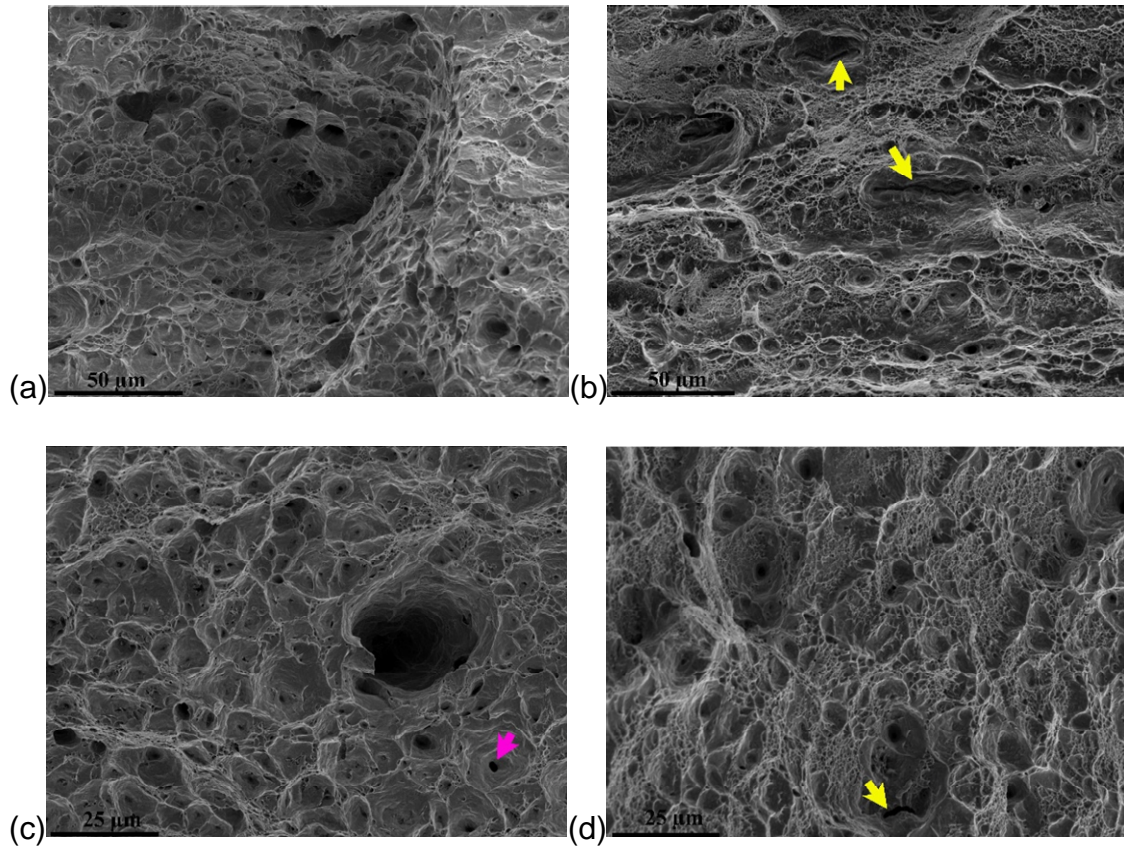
Fracture surface of the tensile test samples (a) as deposited-horizontal (b) heat treated-horizontal(c) as deposited-vertical (d) heat treated-vertical.
